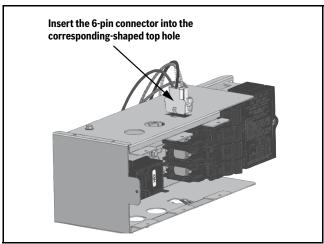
Insert the Connector through the Top Hole of the E-Heat Control Box
